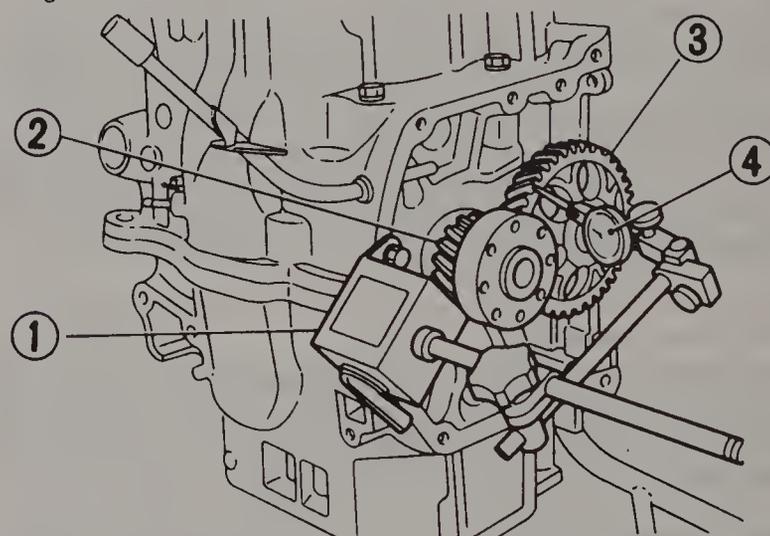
Checking backlash between the crankshaft and camshaft gears (Sec 19)
